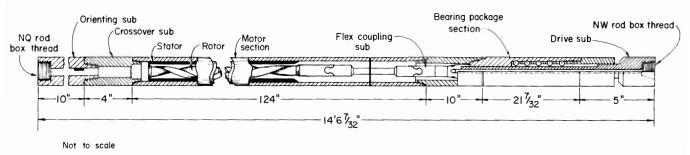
In-hole motor schematic. Stator, rotor and exterior housing are nonmagnetic. Bearing package and drive sub are magnetic.
